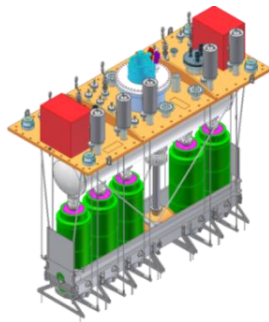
The HIE-ISOLDE Cryomodule Top Plate Assembly and Suspended Internal Equipment
